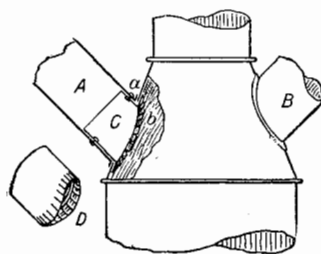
Method of Flanging Round Collars to Round Pipes in a Heating or Ventilating System
